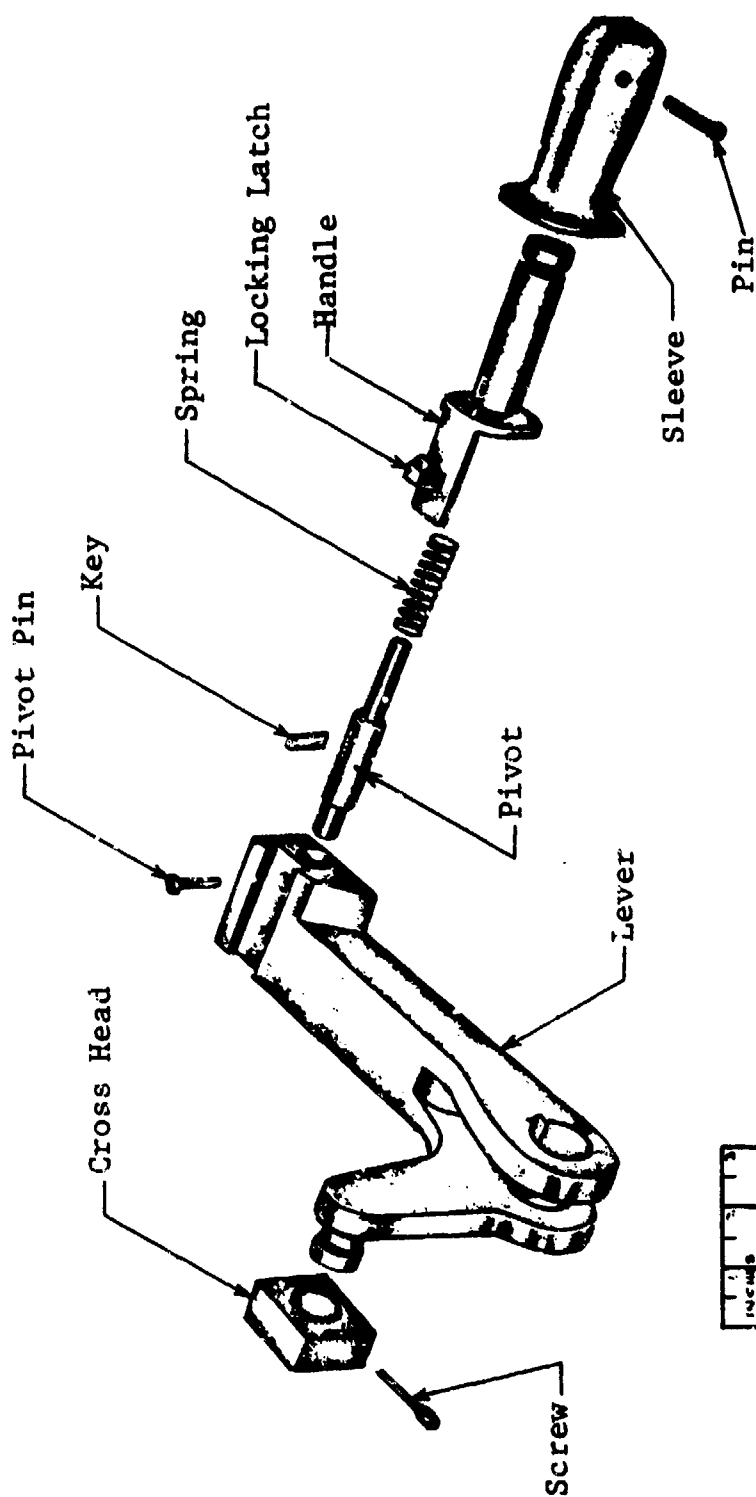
Operating Lever Parts (Horizontal Sliding-Wedge Breech, 105 mm Howitzer, M101) (Ref. 27)
